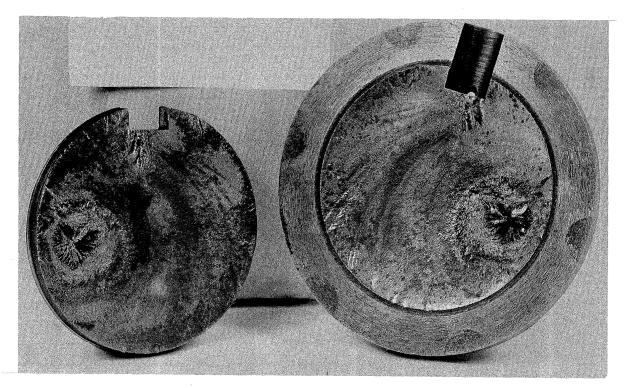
Fracture Surfaces of Shaft in Rotating Bending Resulting from Poor Design Detail. (AISI 1046 Heat Treated to Rockwell C25)
